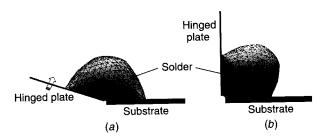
Illustration of solder self-assembly: (a) wet solder at hinged joint; (b) final shape after upward motion due to surface tension forces and solder resolidification.
